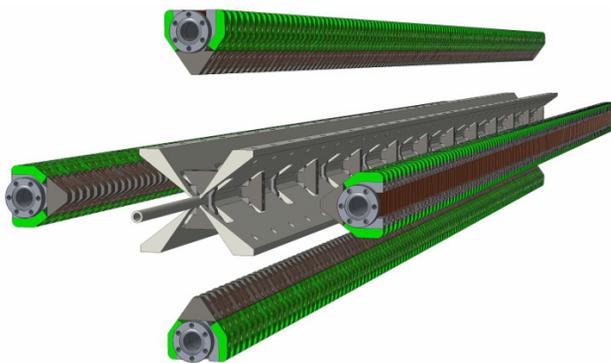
Exploded view of the SCAPE magnet with the beam vacuum chamber [10].
